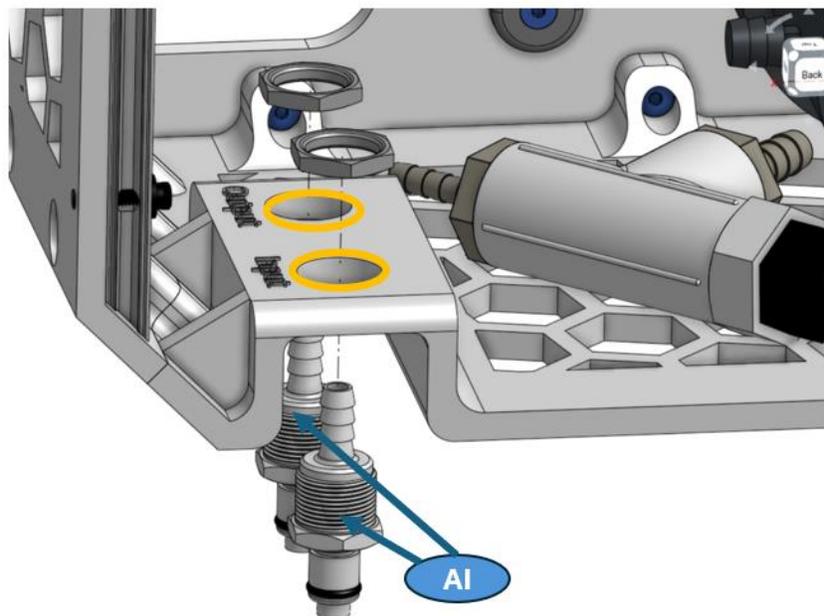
Panel-Mounted Fluid QDs being installed.
